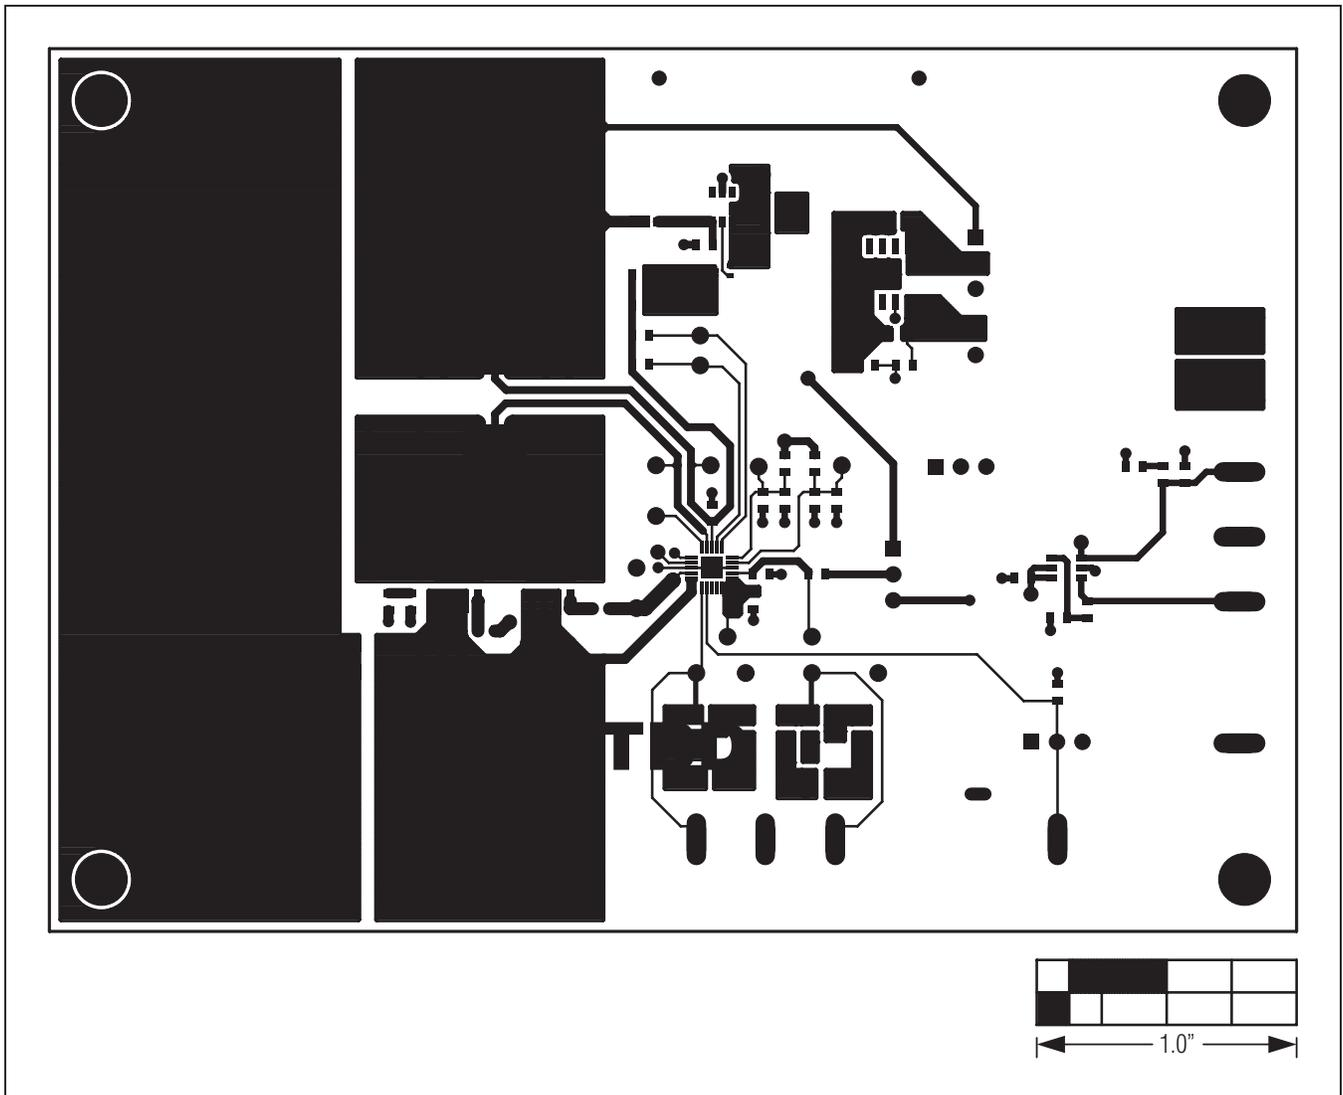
MAX5977A EV Kit PCB Layout—Component Side
